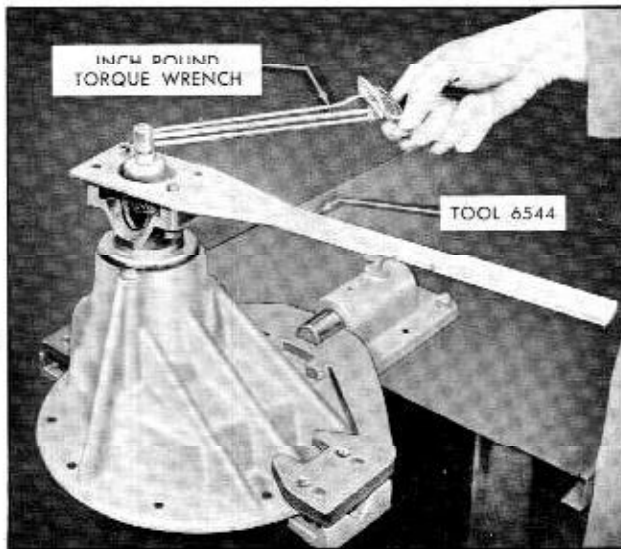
Measuring Bearing Preload With Torque Wrench
